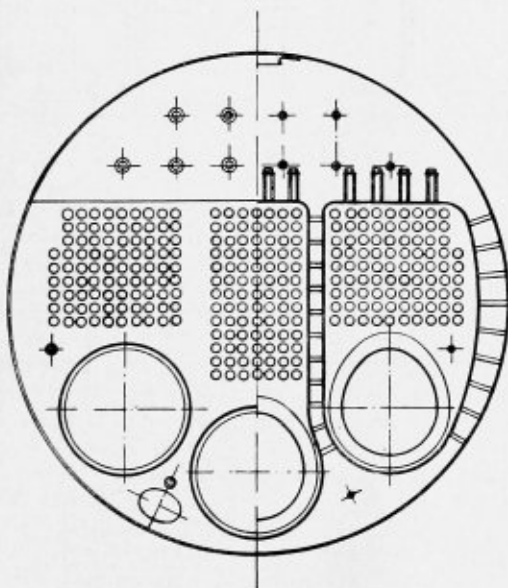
FRONT END VIEW. ELEVATION SECTION
